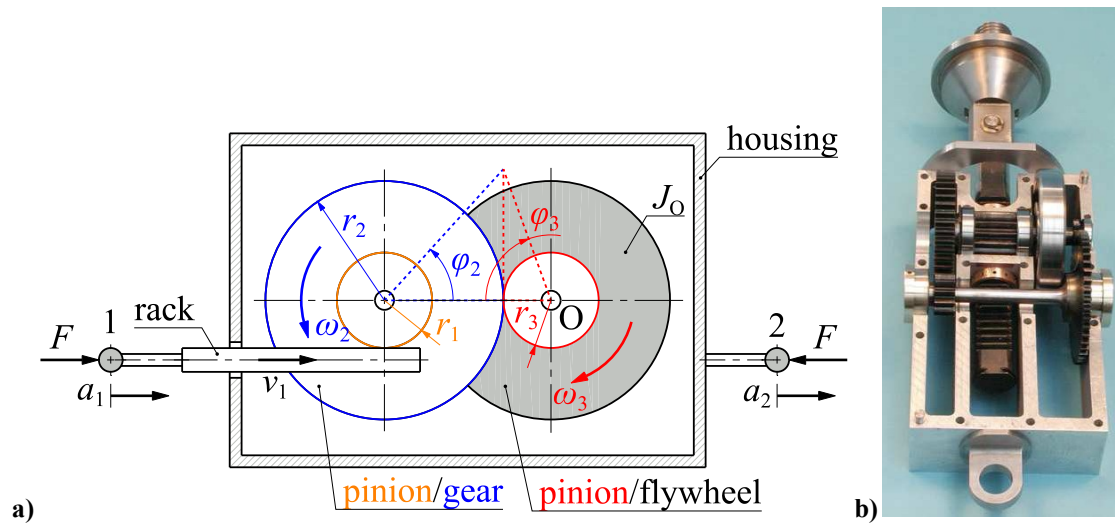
Rack and pinion inerter: a) detailed schematic, b) mechanical prototype [2],[57]
